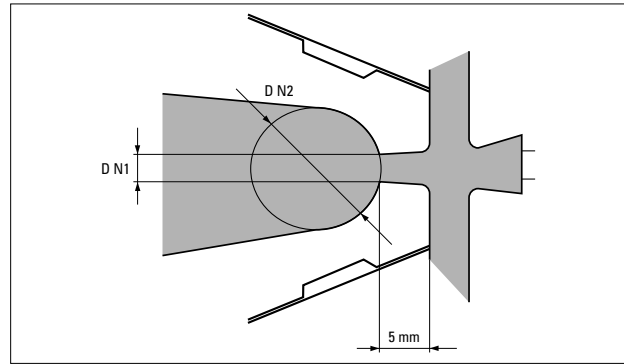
Example of a design of a nozzle without sprue used with 2 plate moulds. Remember that for DELRIN® the nozzle temperature should not exceed 190° C
